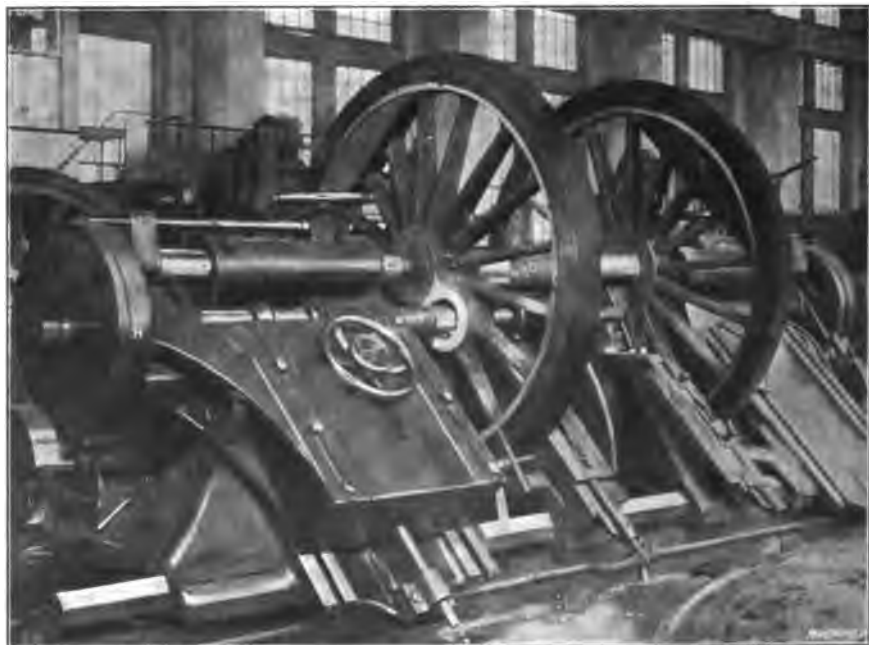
Boring the Crankpin Holes in the Quartering Machine
